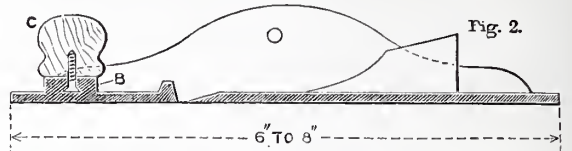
Casting for Block Plane. Fig. 2.—Section through A A.
